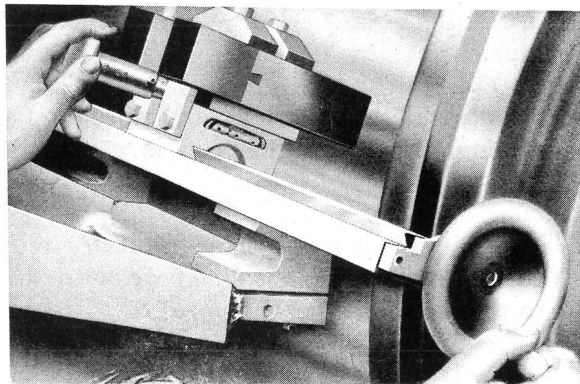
Using a Machine-Mounted Stone Mounted on a Brush Holder Stud and Braced to the Bearing Housing
